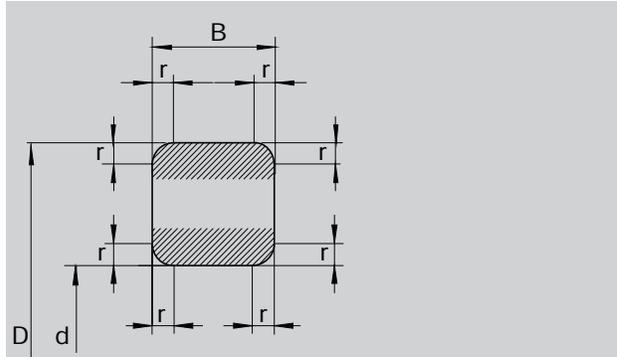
Radial Bearings(Except tapered roller bearings)
